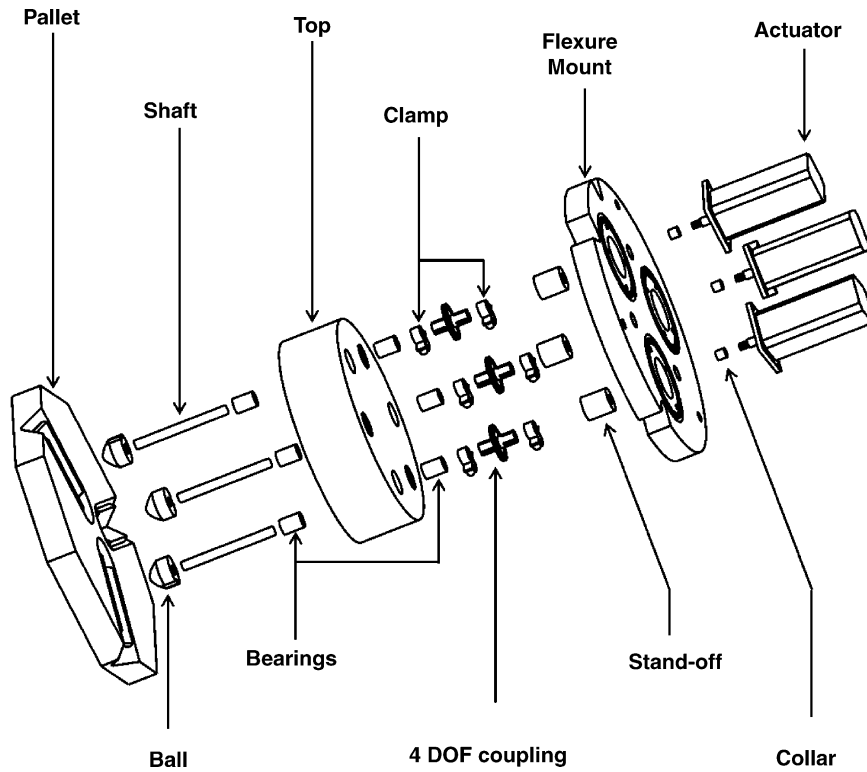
Exploded view of eccentric ball–shaft fixture prototype.
